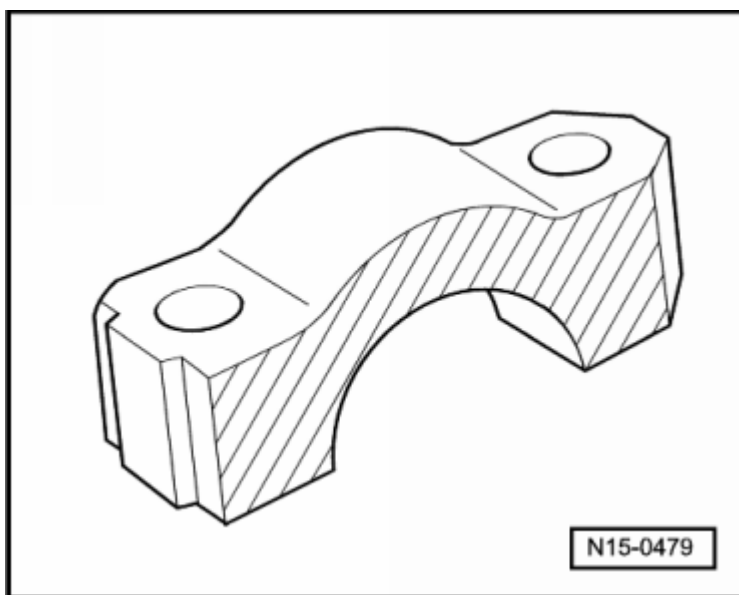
Coating Bearing Caps 7 And 8 Contact Surface With Adhesive Lubricating Paste
